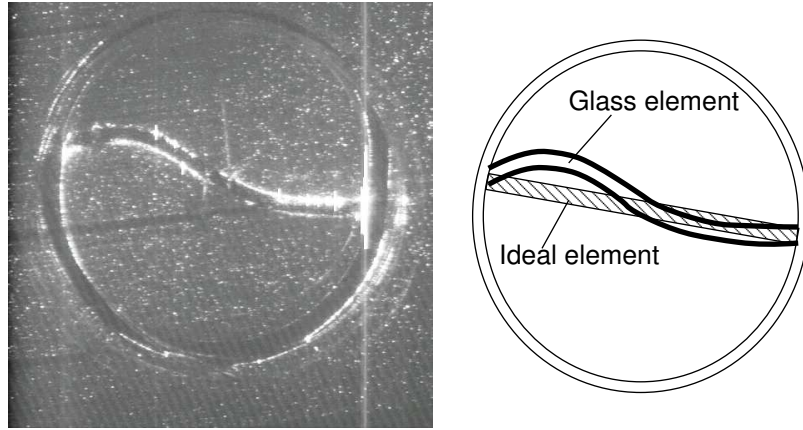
Imperfect shape of glass mixing element (should be straight line)
